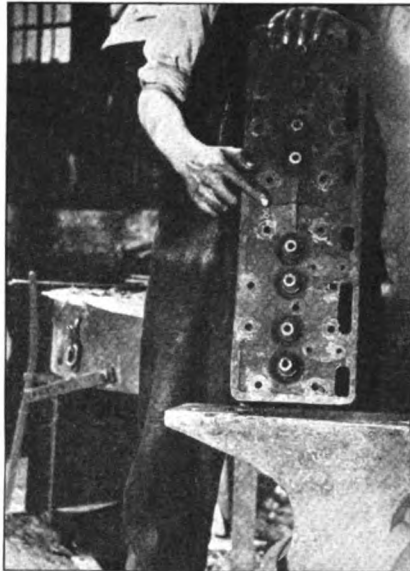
SHOWING LOCATION AND EXTENT OF THE CROSS-SHAPED FRACTURE
